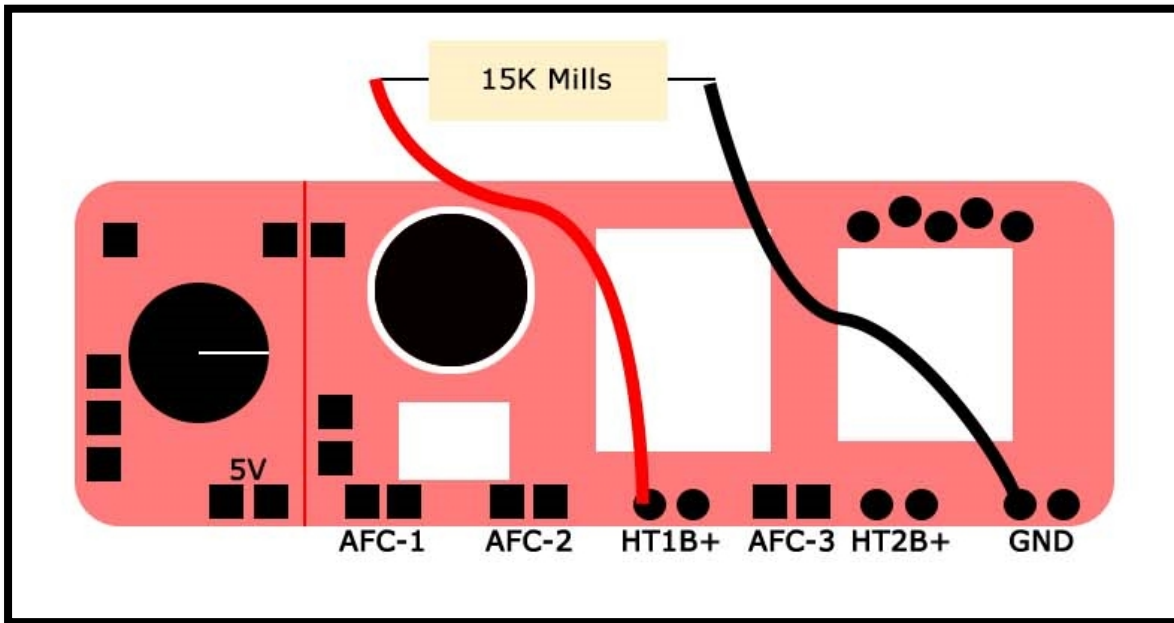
15K Mills Resistor to the Power Supply PCB
